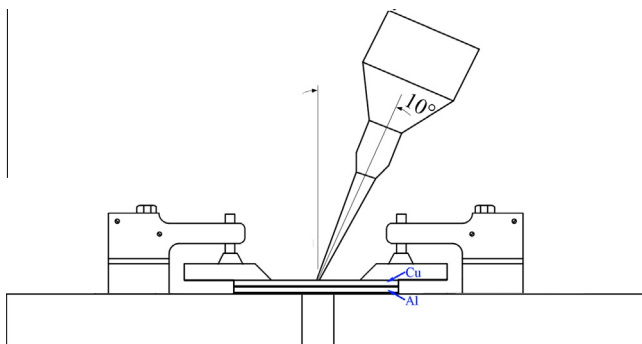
Schematic of the welding jig and overlap joint used in the welding experiment.
